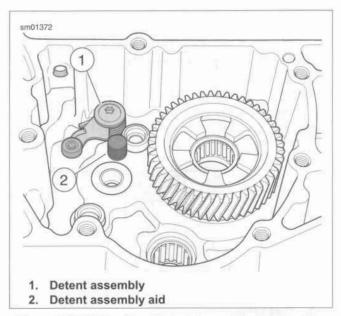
Using Gear Detent Assembly Aid (Part No. B-45520)
